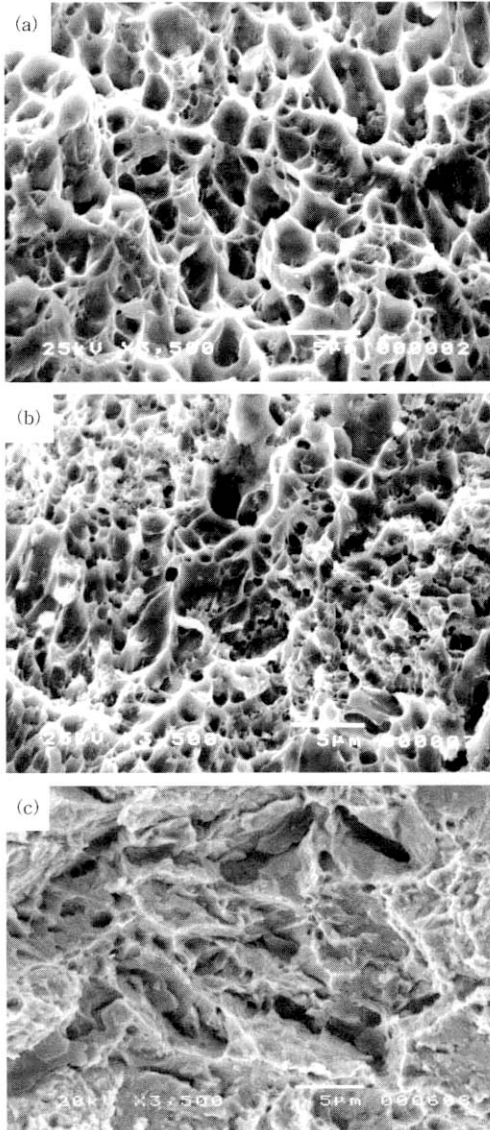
Fractography showing the fractured surface after tensile testing; (a) SS, (b) HC and (c) LS steels.
